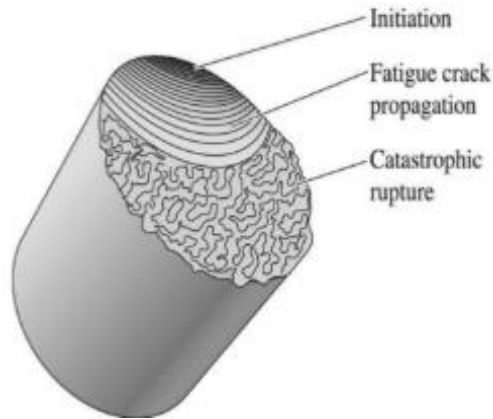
Typical Fatigue Fracture Surface [24]
